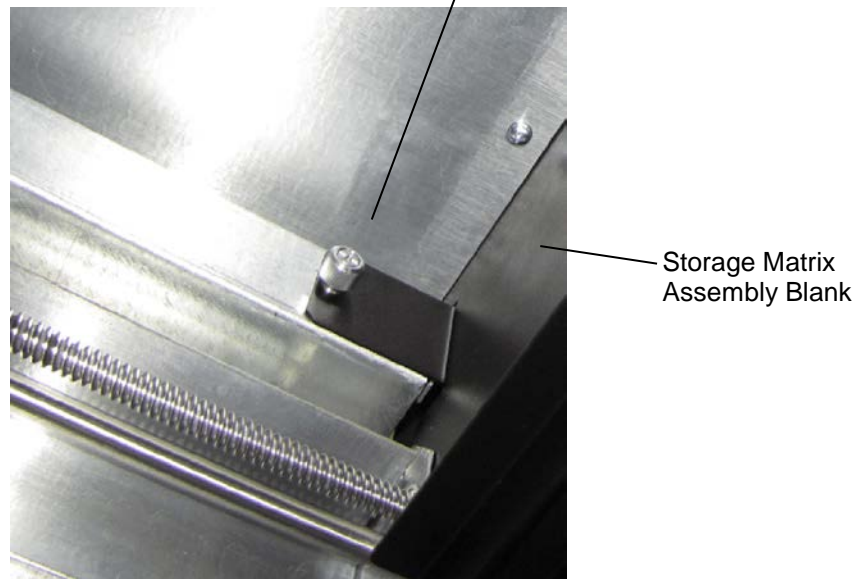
Captive screw shown securing the bottom tab of the Storage Matrix Assembly Blank
